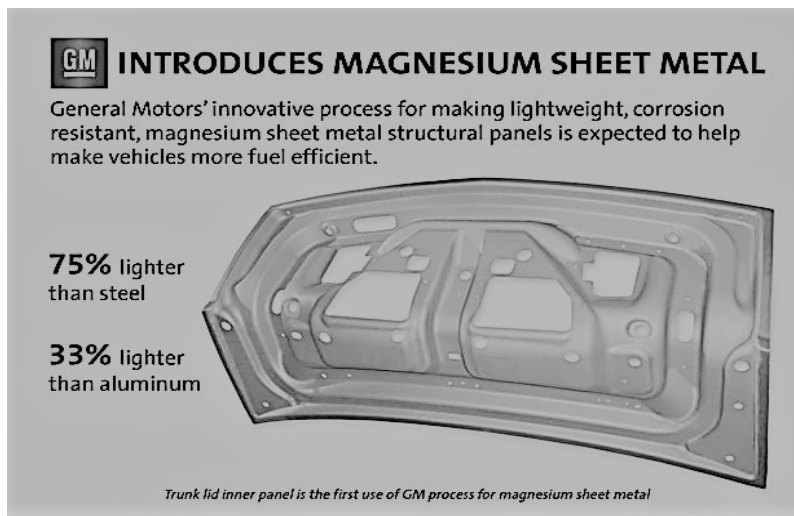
Thermo-formed Magnesium Panel – General Motors
